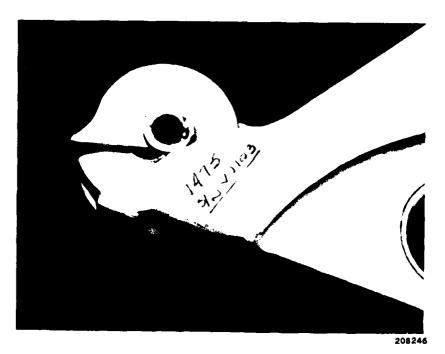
Failure Mode Exhibited by Lateral Differential Bellcrank Assembly, Fatigue Test Specimen Number 1 of 7475-T73 ITMT Material
